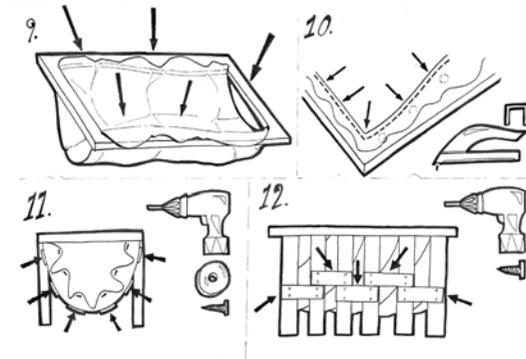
Steps from storyboard for the construction of the *Rope Bench*, appendix 8.9
